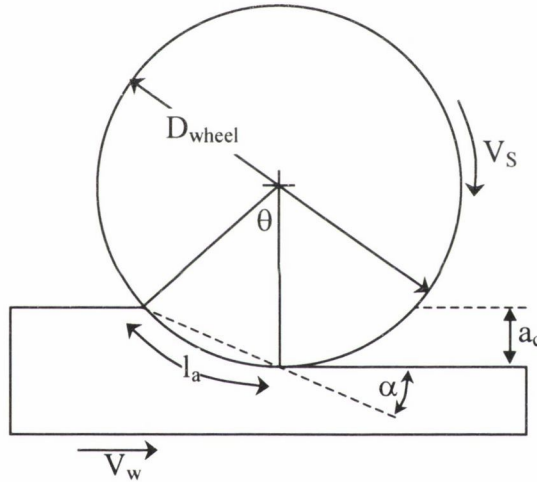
Geometry of wheel and workpiece in creep-feed grinding.
